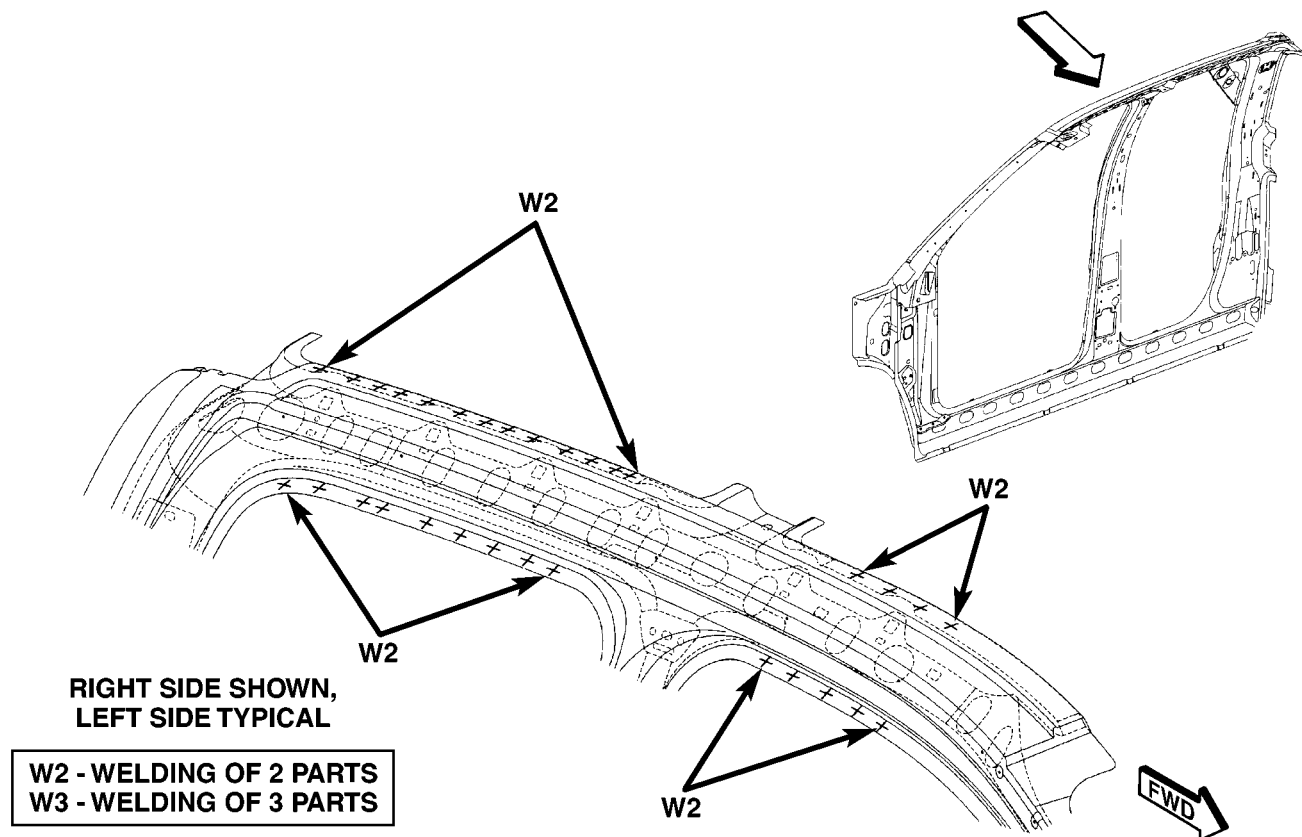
OUTER BODY SIDE APERTURE - QUAD CAB
